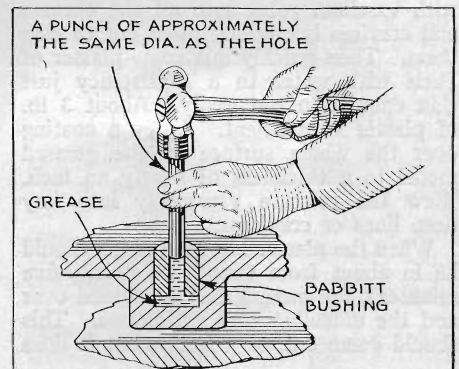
By filling with grease and using bolt, bushing in blind hole can be removed.
